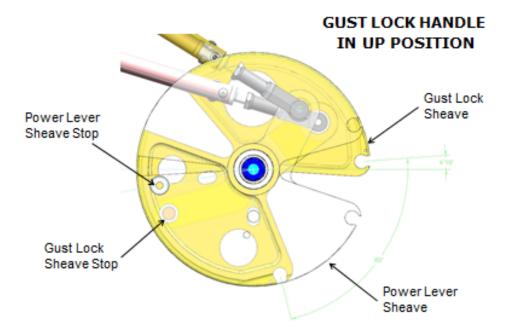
Gust Lock and Throttle Lever Sheave Assemblies
